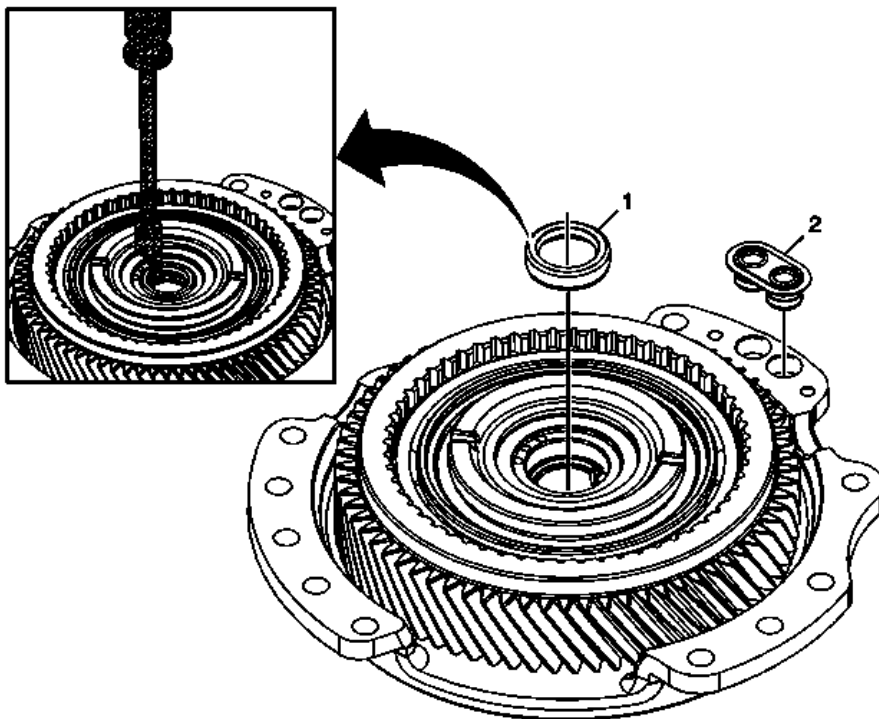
Identifying Front Differential Transfer Drive Gear Support Seal
